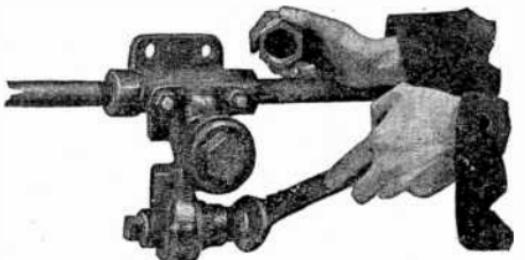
,273.—*Westinghouse control operation 2.* Adjusting reducing valve to change air pressure.
